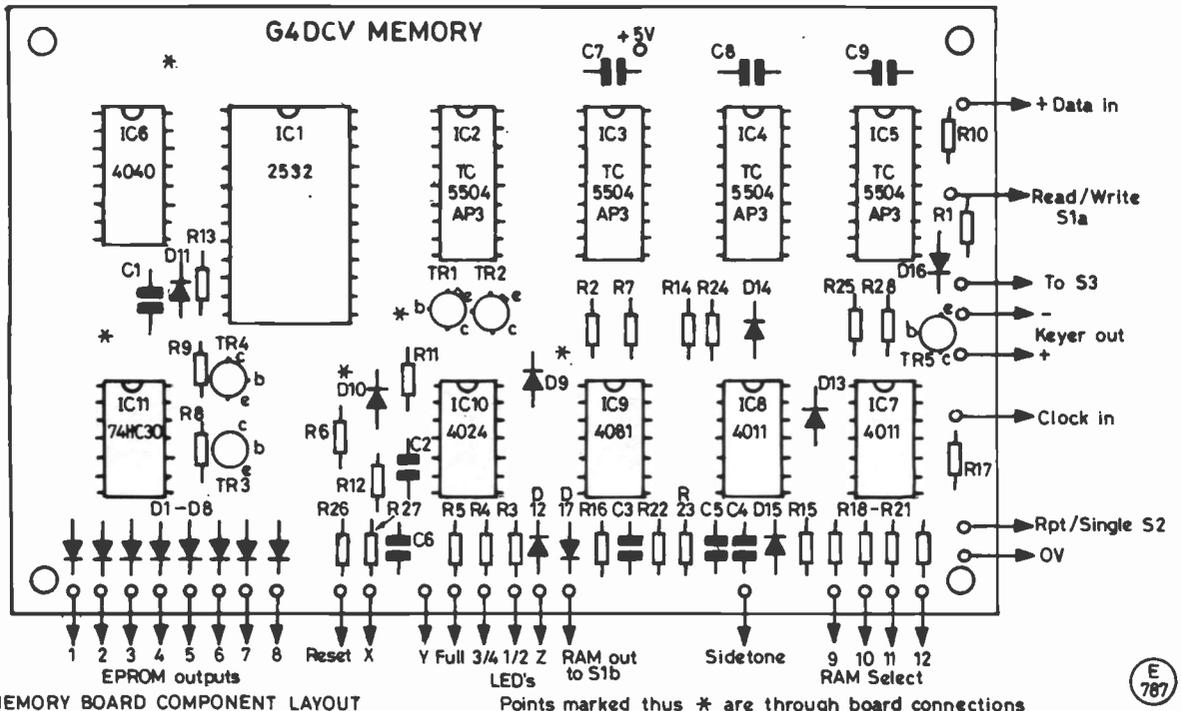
MEMORY BOARD COMPONENT LAYOUT
